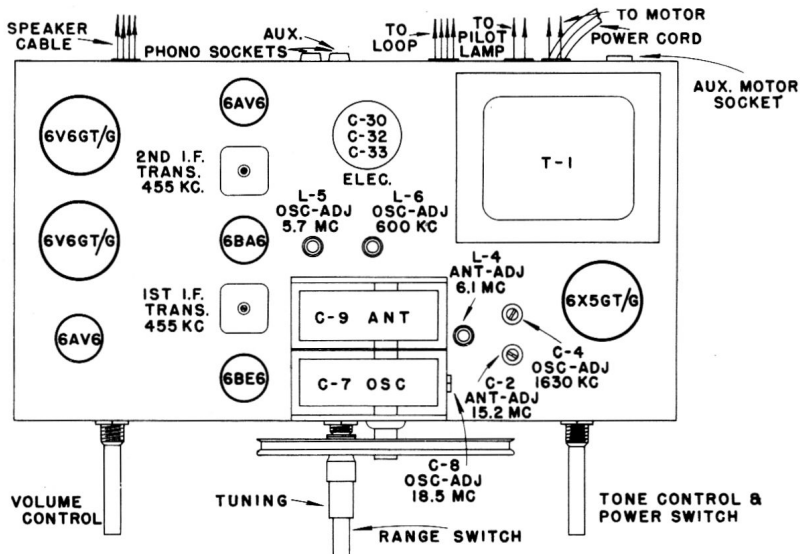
CHASSIS LAYOUT AND ALIGNMENT ADJUSTMENT
